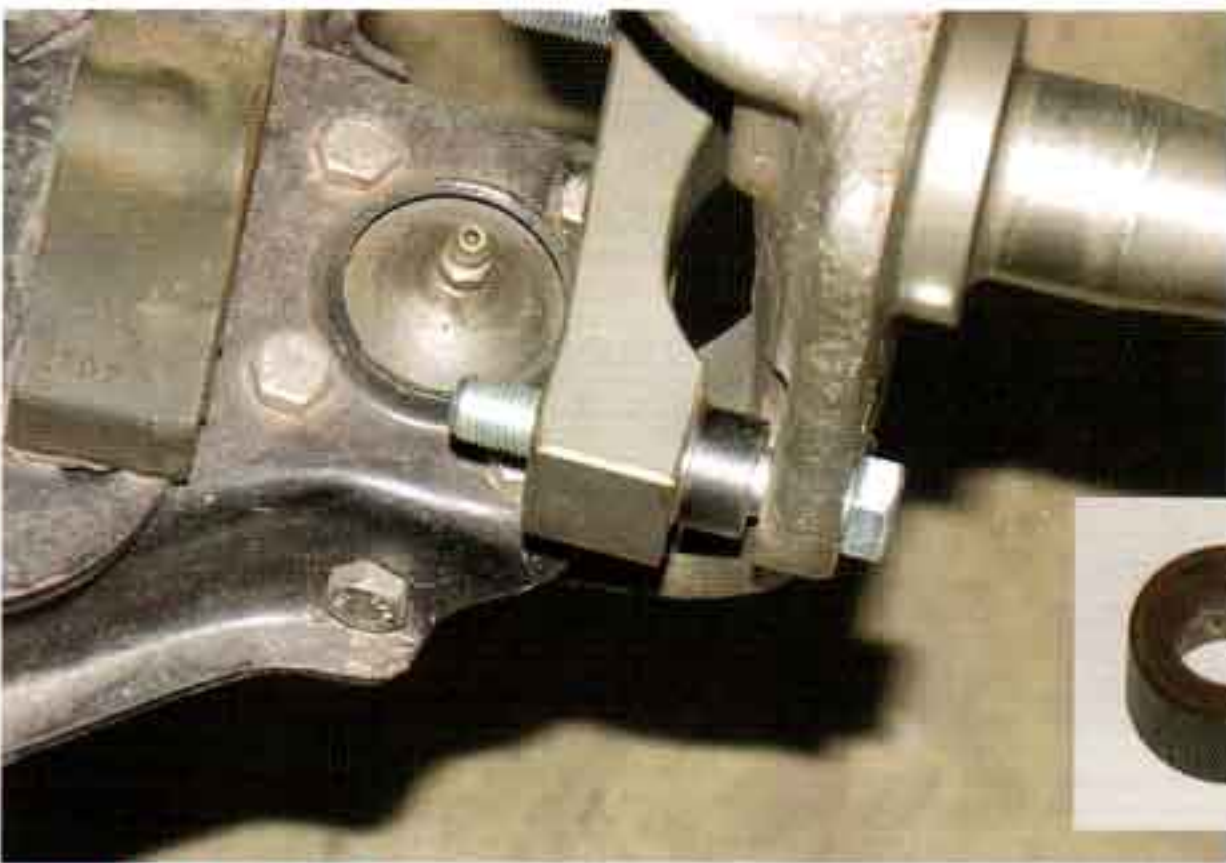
& 5b: At the forward spindle hole, slip the 3/8" spacer provided between the spindle and the steering arm. Install the 7/16" x 2-1/2" bolt through the spindle, the spacer and into the steering arm. The steering has now been spaced in 3/8" so the front end toe-in will need to be reset.
